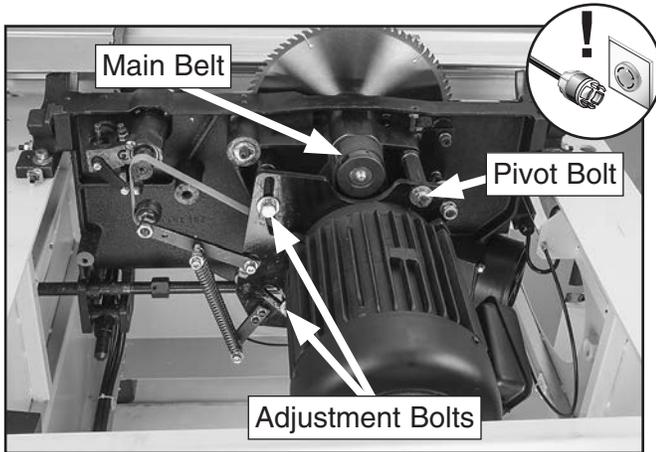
Locations of adjustment and pivot bolts (cast-iron table removed for clarity).
